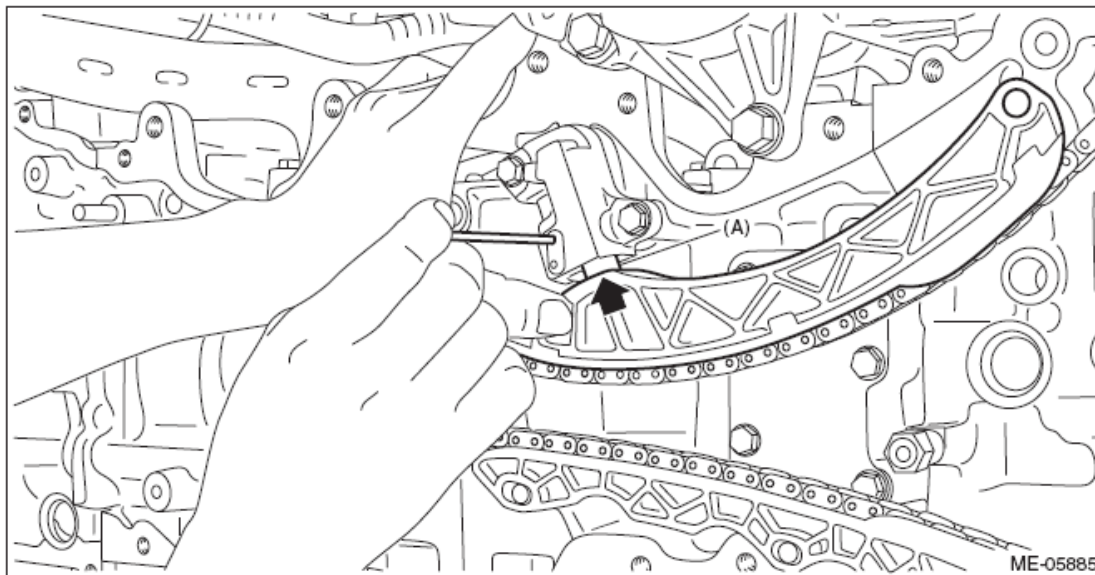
Inserting Hex Wrench Into Stopper Pin Hole In Chain Tensioner
